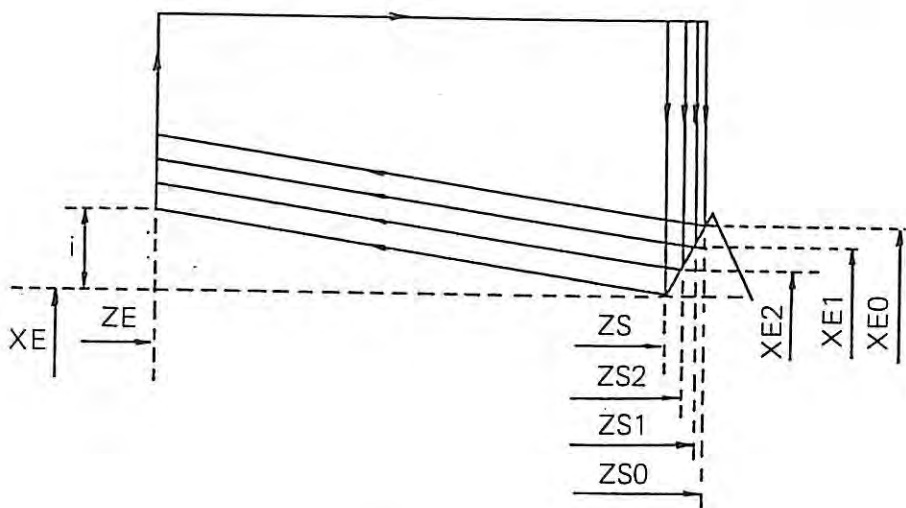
Tool path in the longitudinal thread cutting compound fixed cycle (OSP3000)
